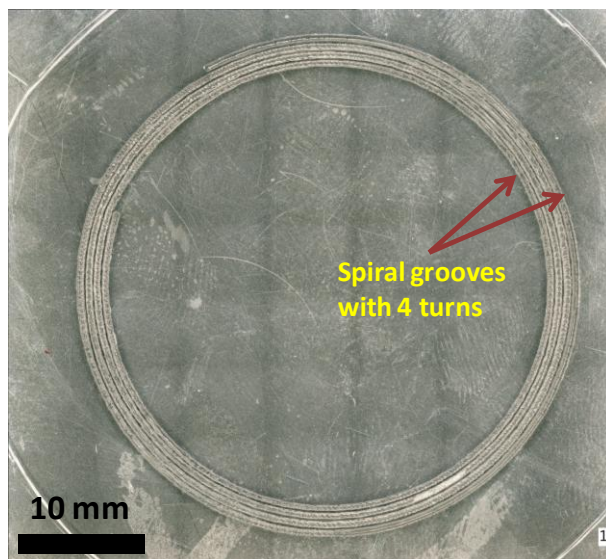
Optical photo of the mold which was used to fabricate PDMS membrane with spiral grooves.
